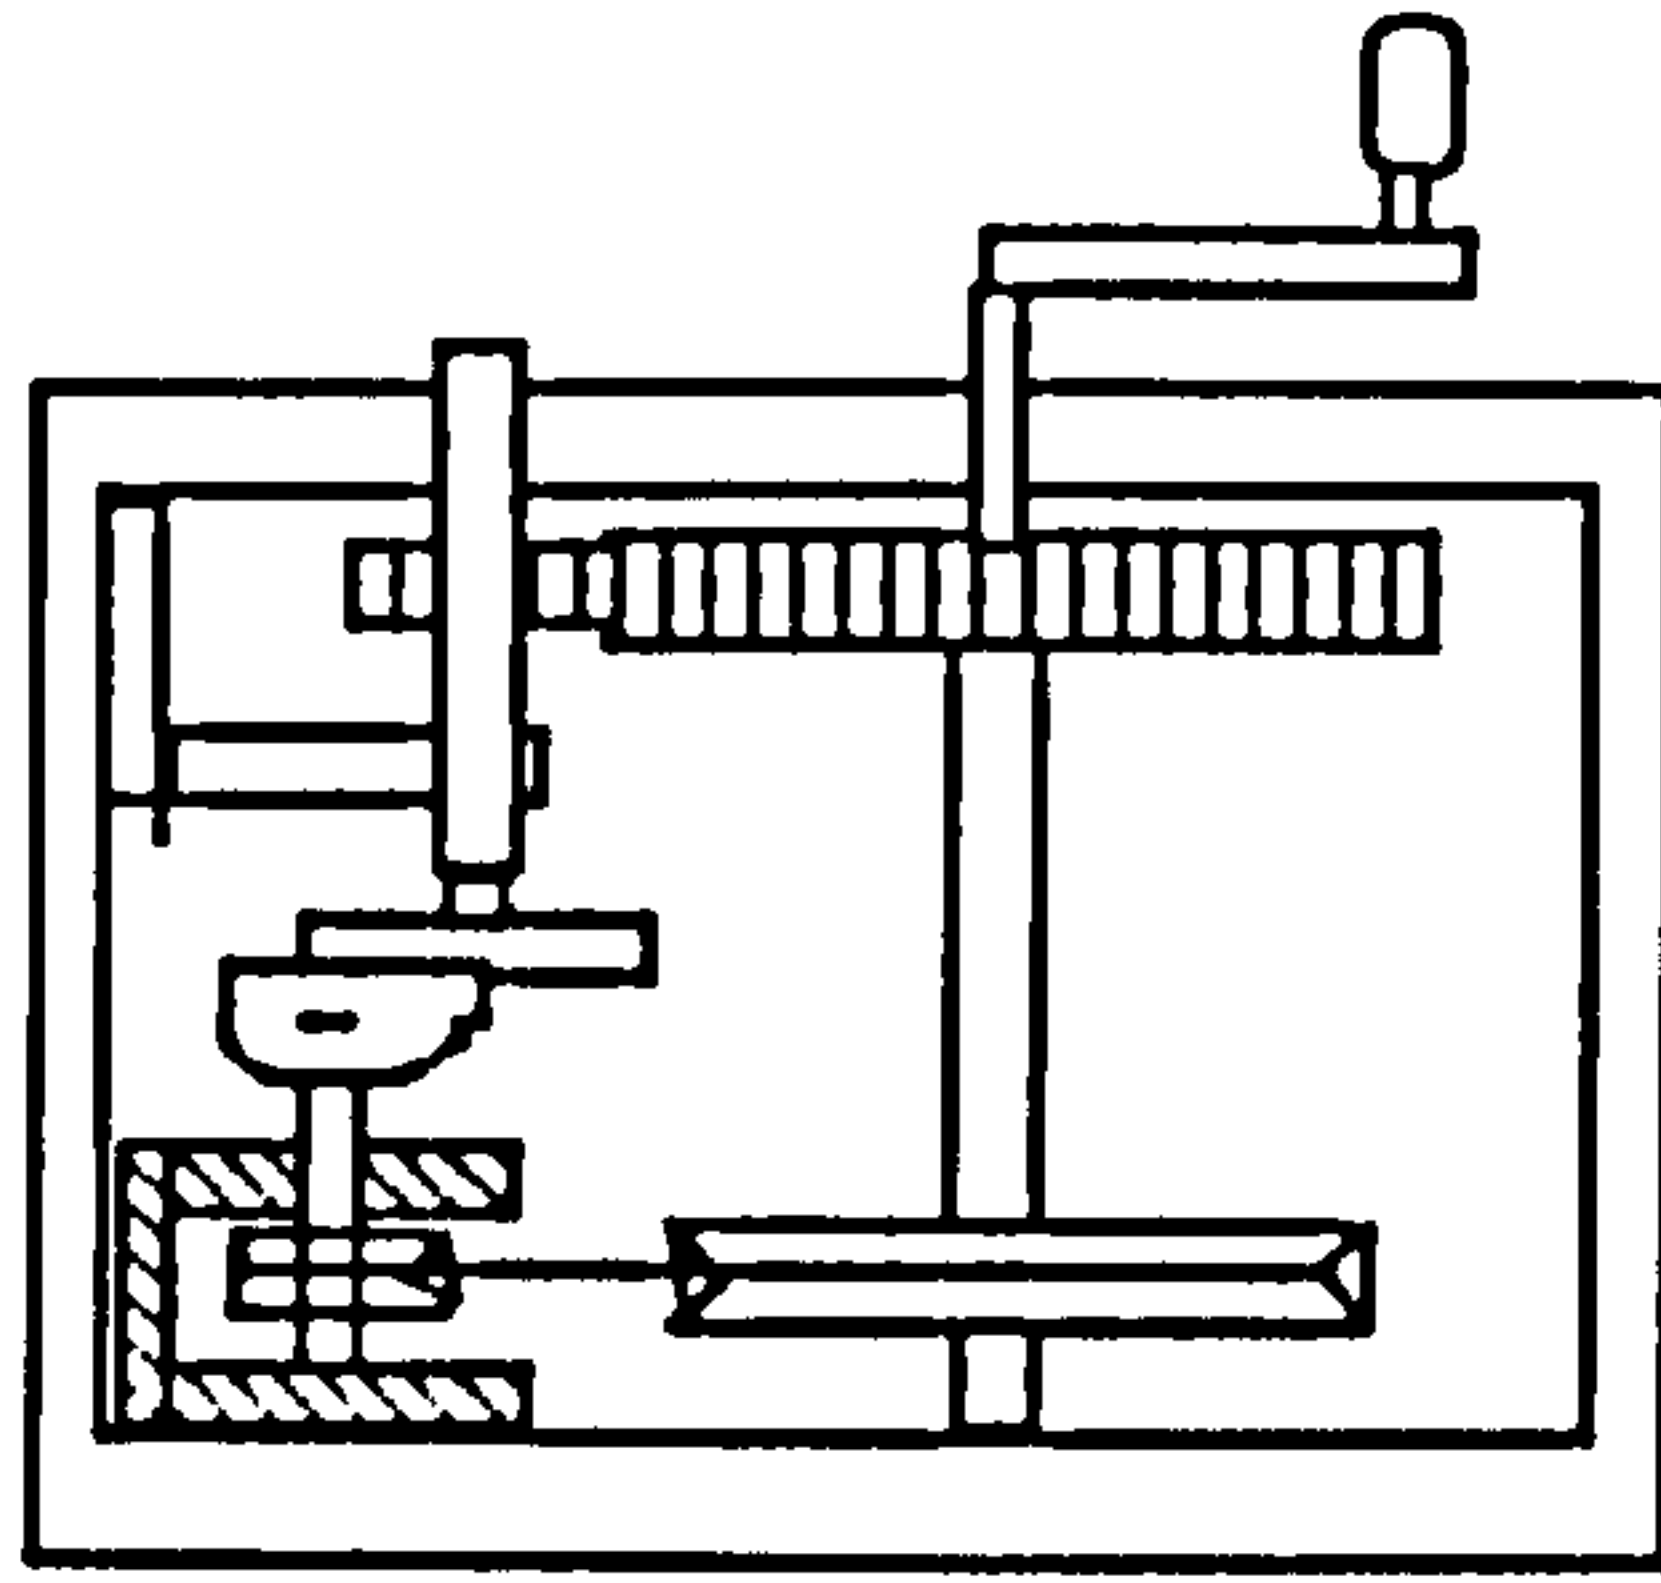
Machine of 1665 to grind big lenses⁴⁰.
